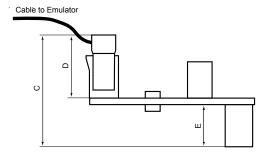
The ADA-ISO-T114-E probe. Side view. C=20.5 mm (.81 in.), D=14.2 mm (0.56 in.), E=8.5 mm (0.33 in.).
